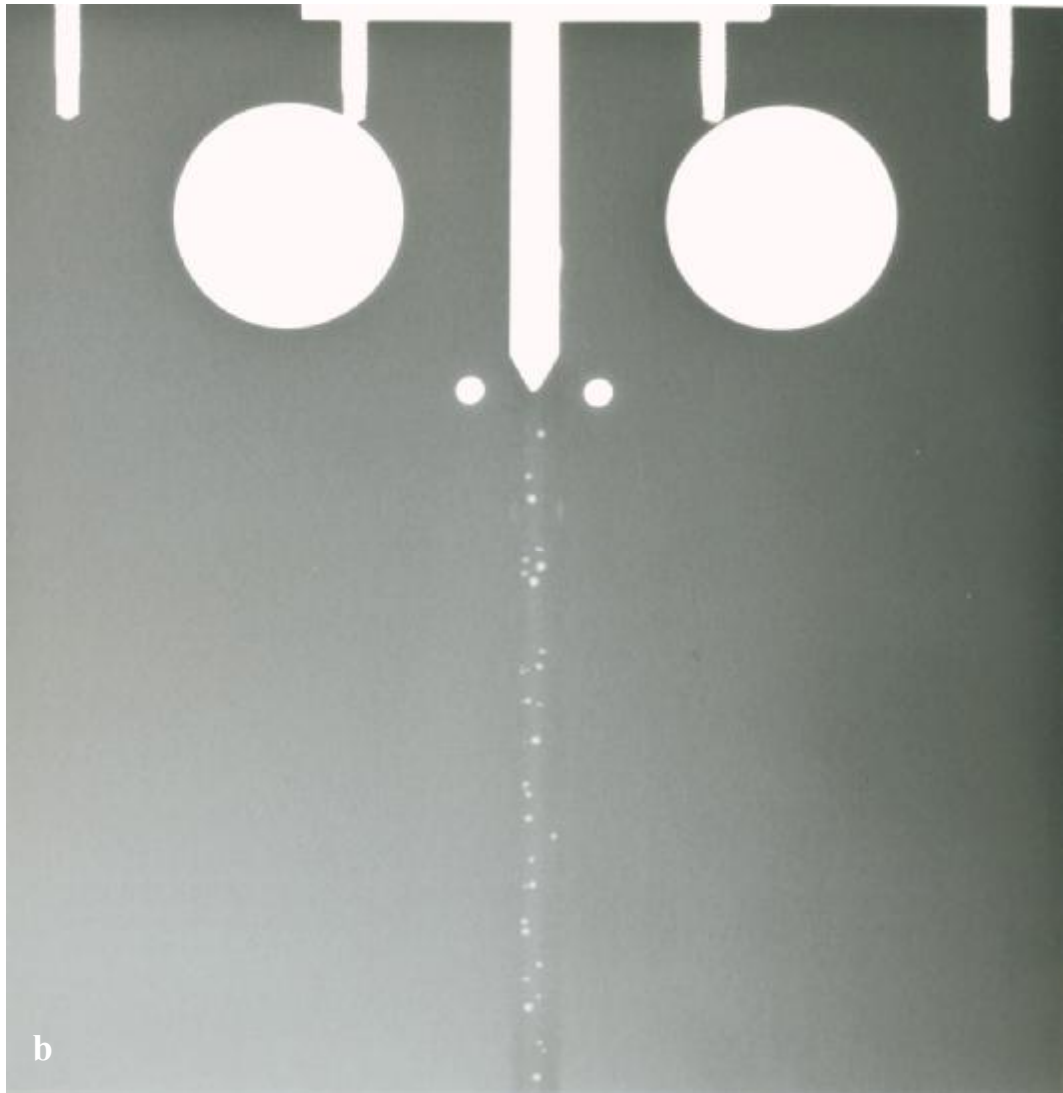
Porosity in the fusion zone laser beam welded joint used in this study (a,b) [Countined].
